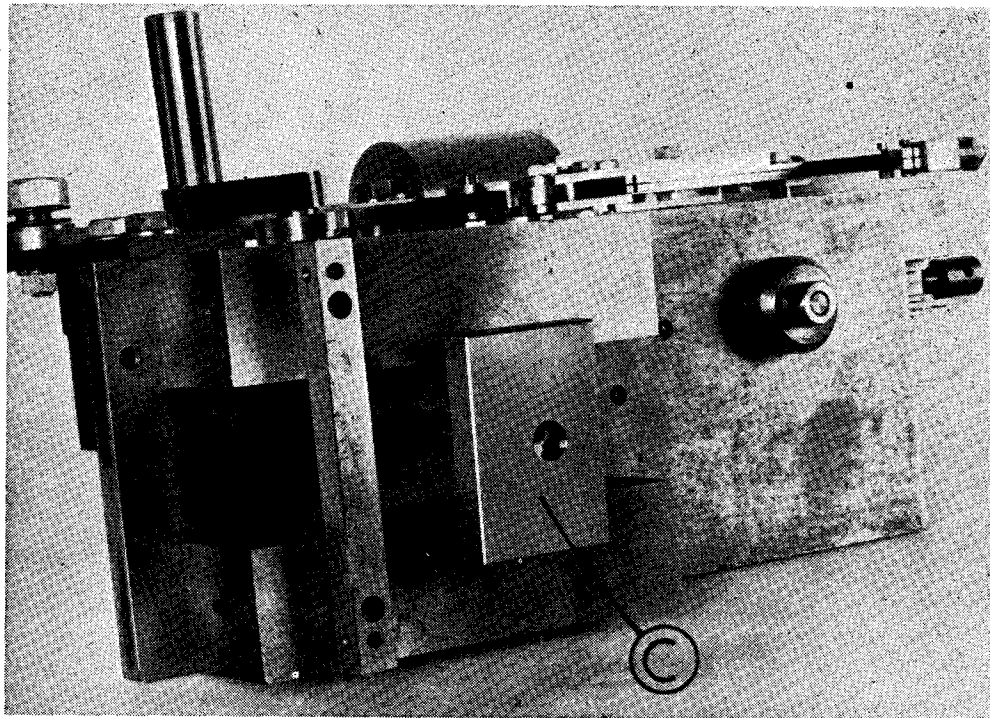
Underside of the base, showing the raising blocks, the guide strip and the clamp bolt with its clamp plate, "C"
